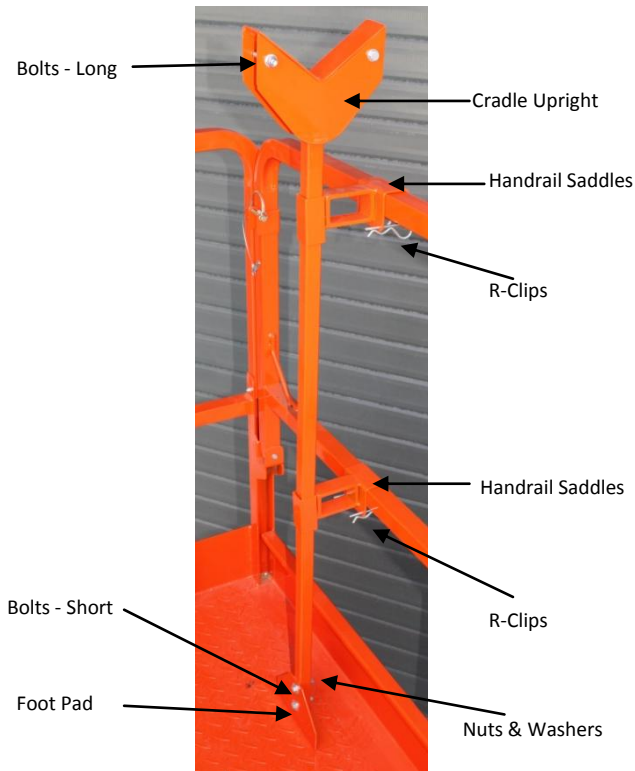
Heavy Pipe Lifter Attachment assembly
